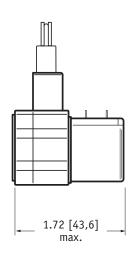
Outline Drawing (w/o mounting bracket):
